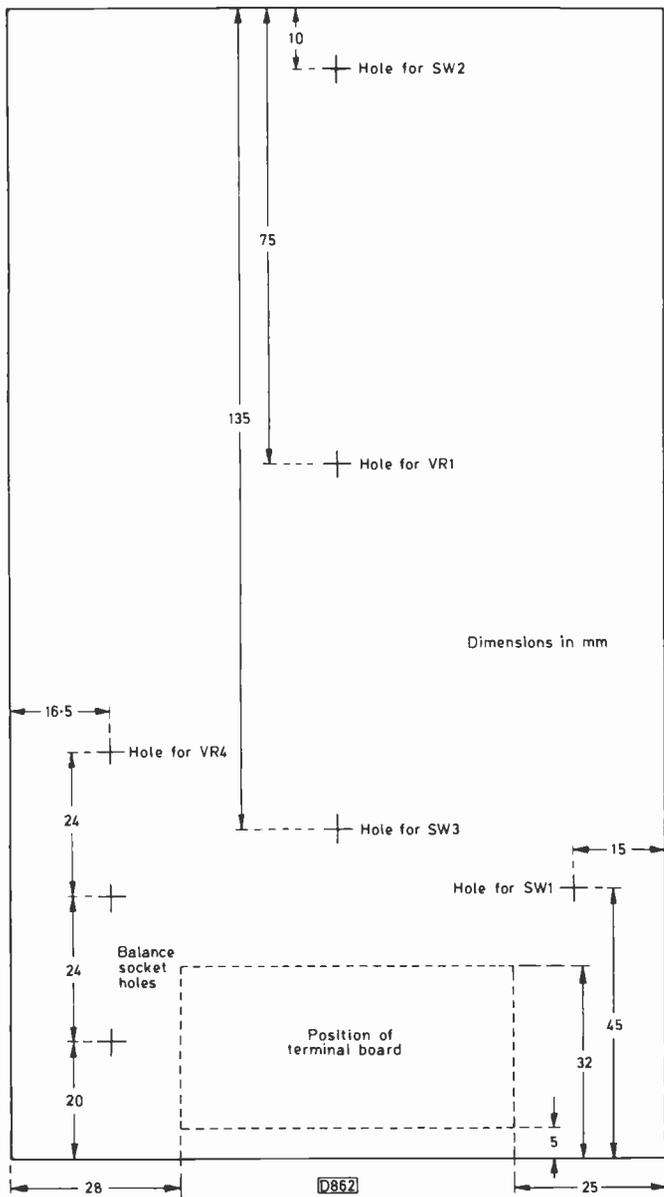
Suggested drilling details for the case top. Hole sizes depend on the components used.
